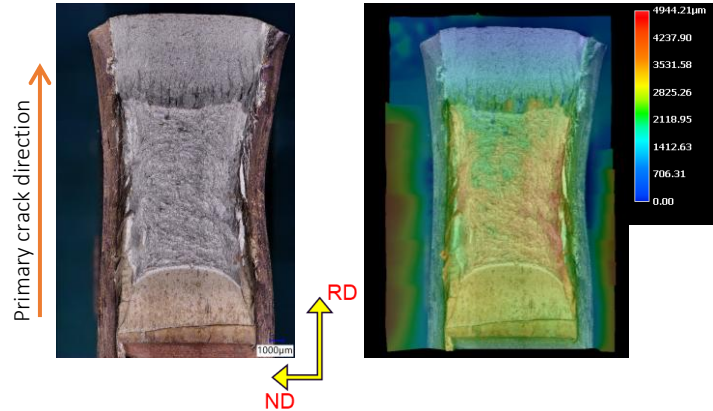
Stereo and depth field image (top view) of the Pipe X fracture surface.
